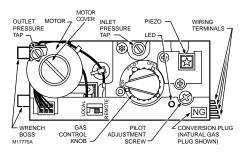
RV8310E top view, showing motor cover and conversion plug location.
